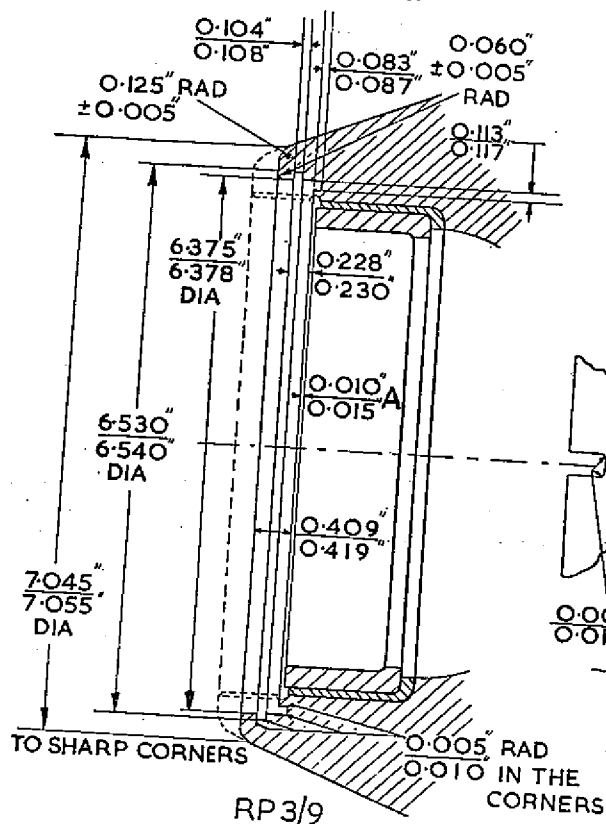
Dimensions for machining hub with liner and outer track of bearing in position
